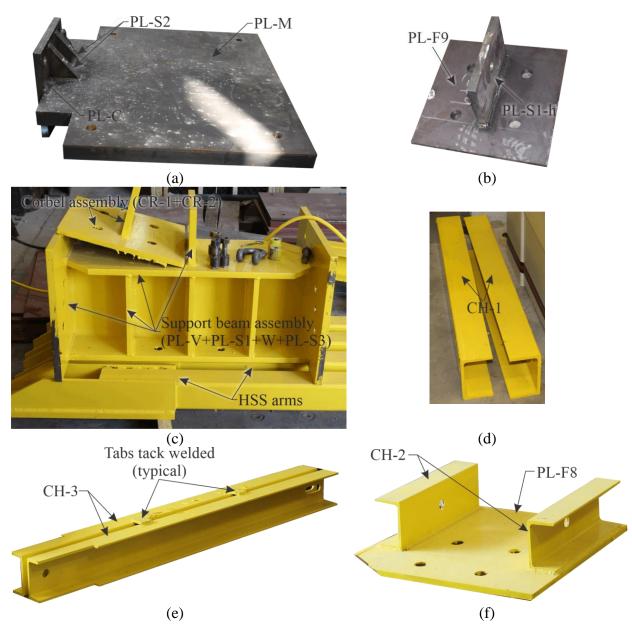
Test setup assemblies: (a) Parent middle plate assembly; (b) PL-F9 and PL-S1-h assembly; (c) HSS arms, support beam, and corbel assemblies; (d) CH-1 coated with paint; (e) CH-3 assembly; (f) CH-2 and PL-F8 assembly
